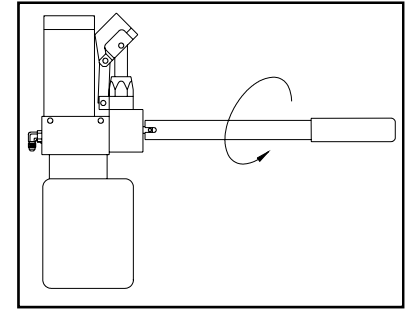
DEPLOY OR LOWER PLATFORM
